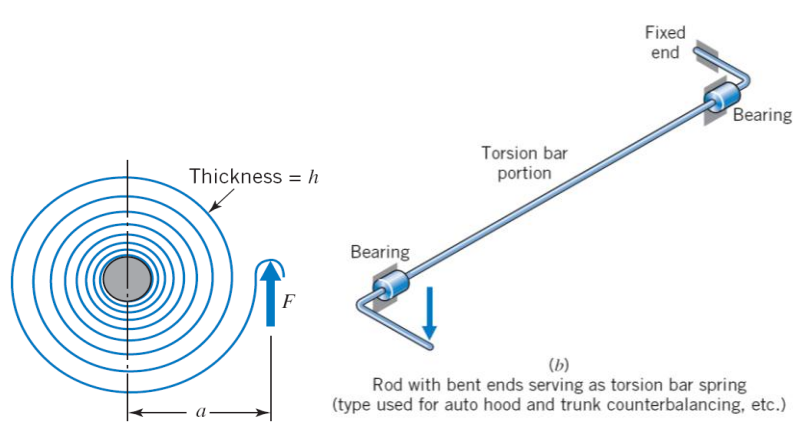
Two types of springs used in the decklid and hood assembly<sup>2</sup>
